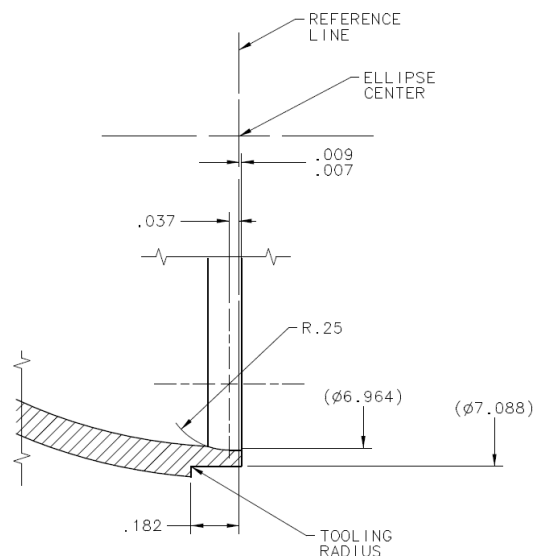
Detail of the equator weld-prep. 0.009" additional length was estimated for weld shrinkage and an undercut was specified to obtain a uniform diameter in the weld area. Dimensions are in inches.
